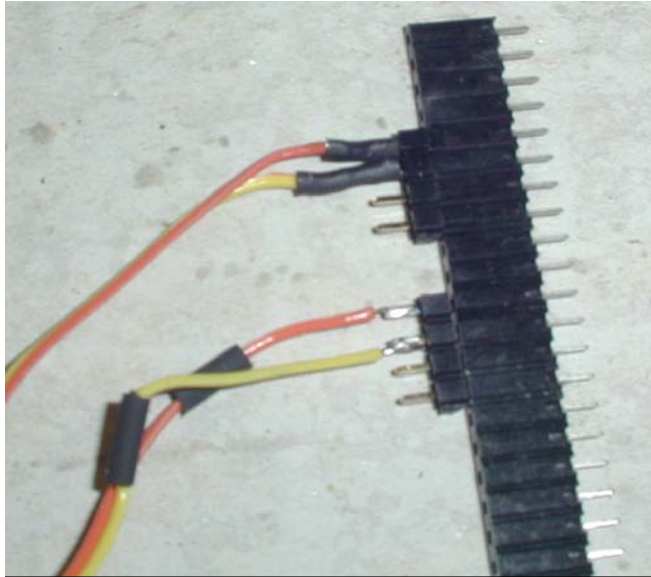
Using Female Connector to Hold Male Connectors While Soldering
